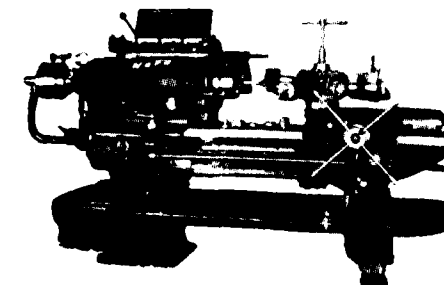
No. 7 Fusible Plug Capstan Lathe fitted with air operated two jaw chuck.
